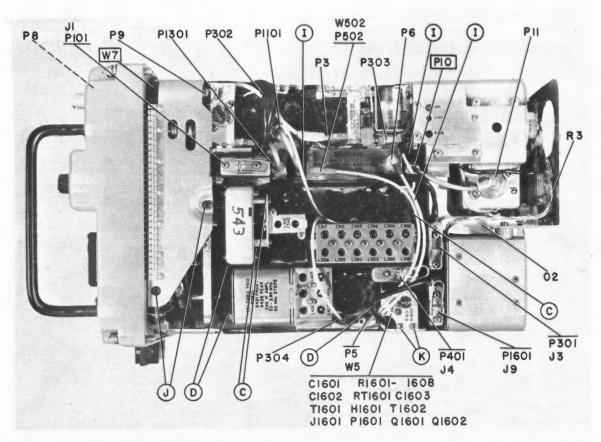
Receiver Transmitter RT-581()/URC-9, Right Side, Subassembly Removal
